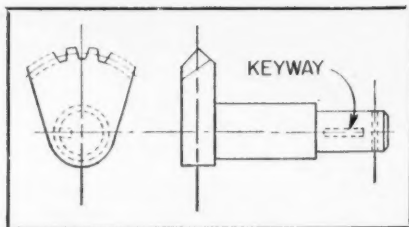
Drawing of a Rack Bevel Gear Segment Shaft
